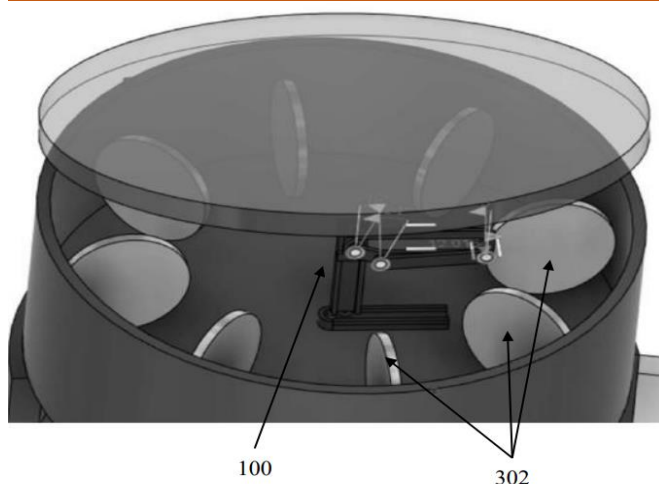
illustrates a perspective view of the first cleaning assembly adapted to clean flat utensils arranged vertically in a horizontal plane of dishwasher.
